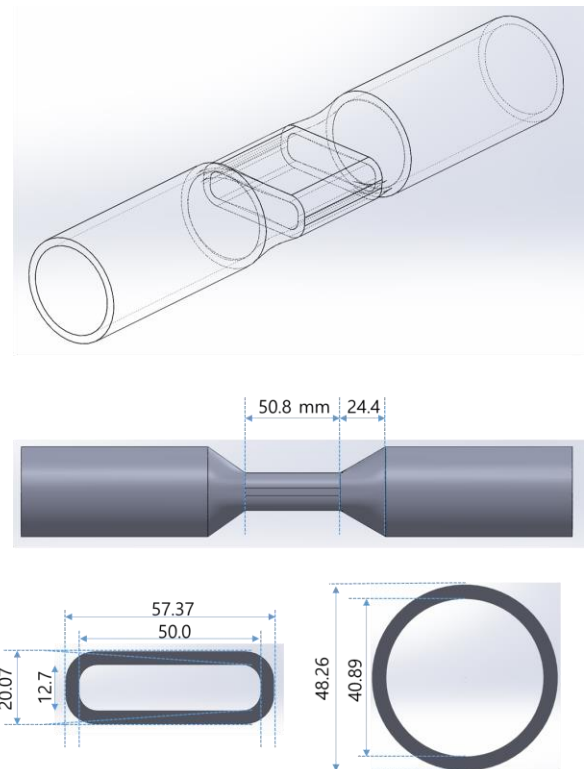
Essential dimensions and CAD modeling of MSRE freeze valve, excluding cooling shroud.
